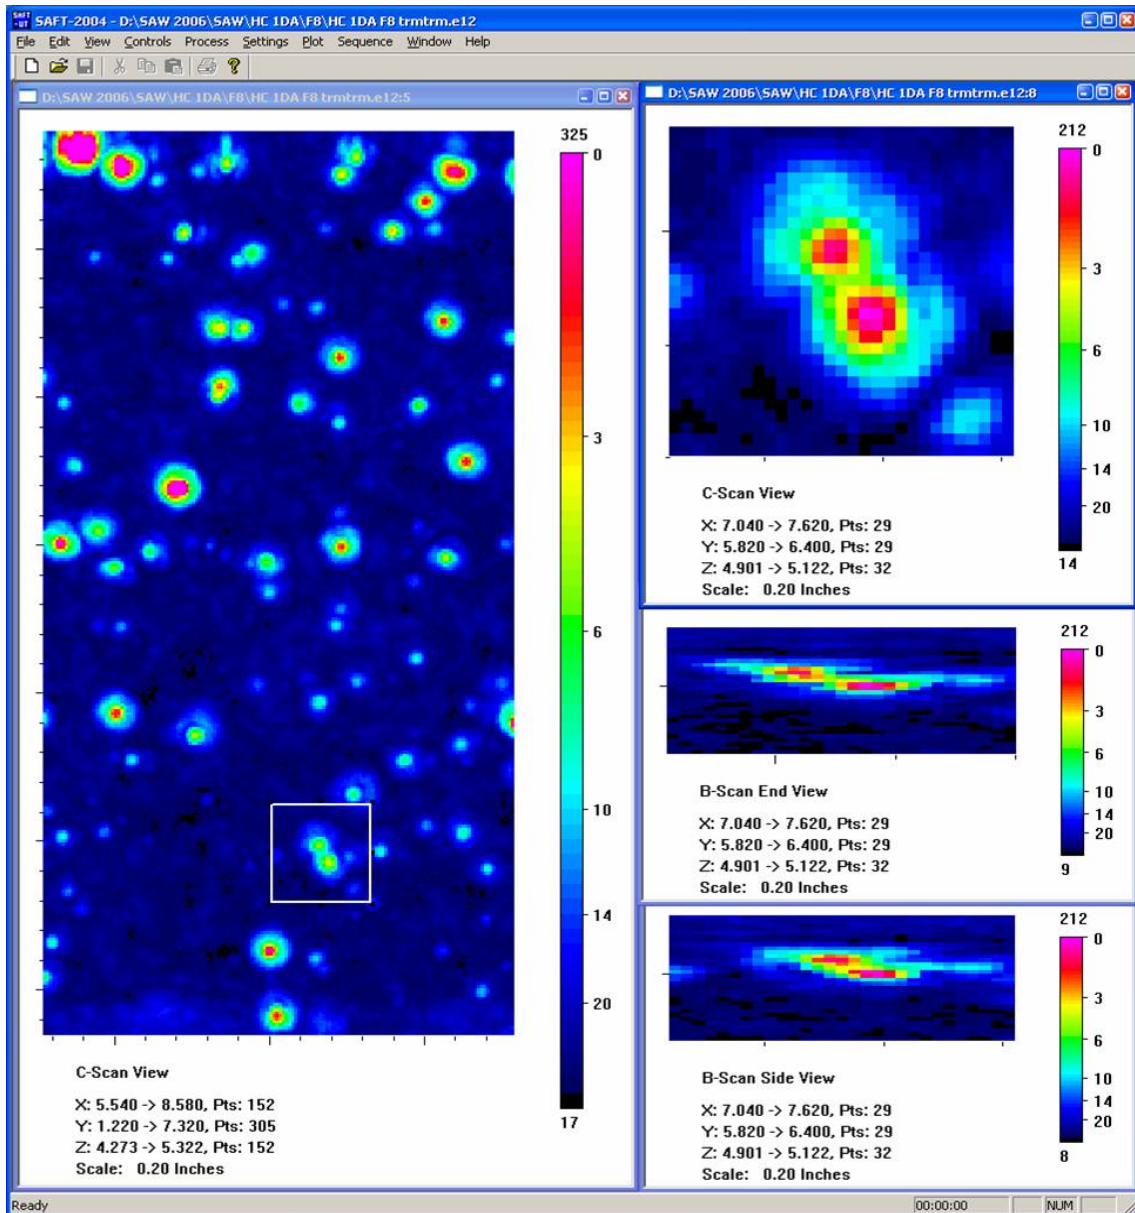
a 10 MHz F8 Immersion Testing Images of Small Fabrication Flaw: HC5A. This figure shows immersion testing data of a 7-mm flaw indication from the weld-normal testing of large weld segments. The flaw indication is identified in the box drawn in the SAFT-UT image on the left in the figure. A close up of the flaw in the C-scan view (top right) shows 2 unresolved flaws.
